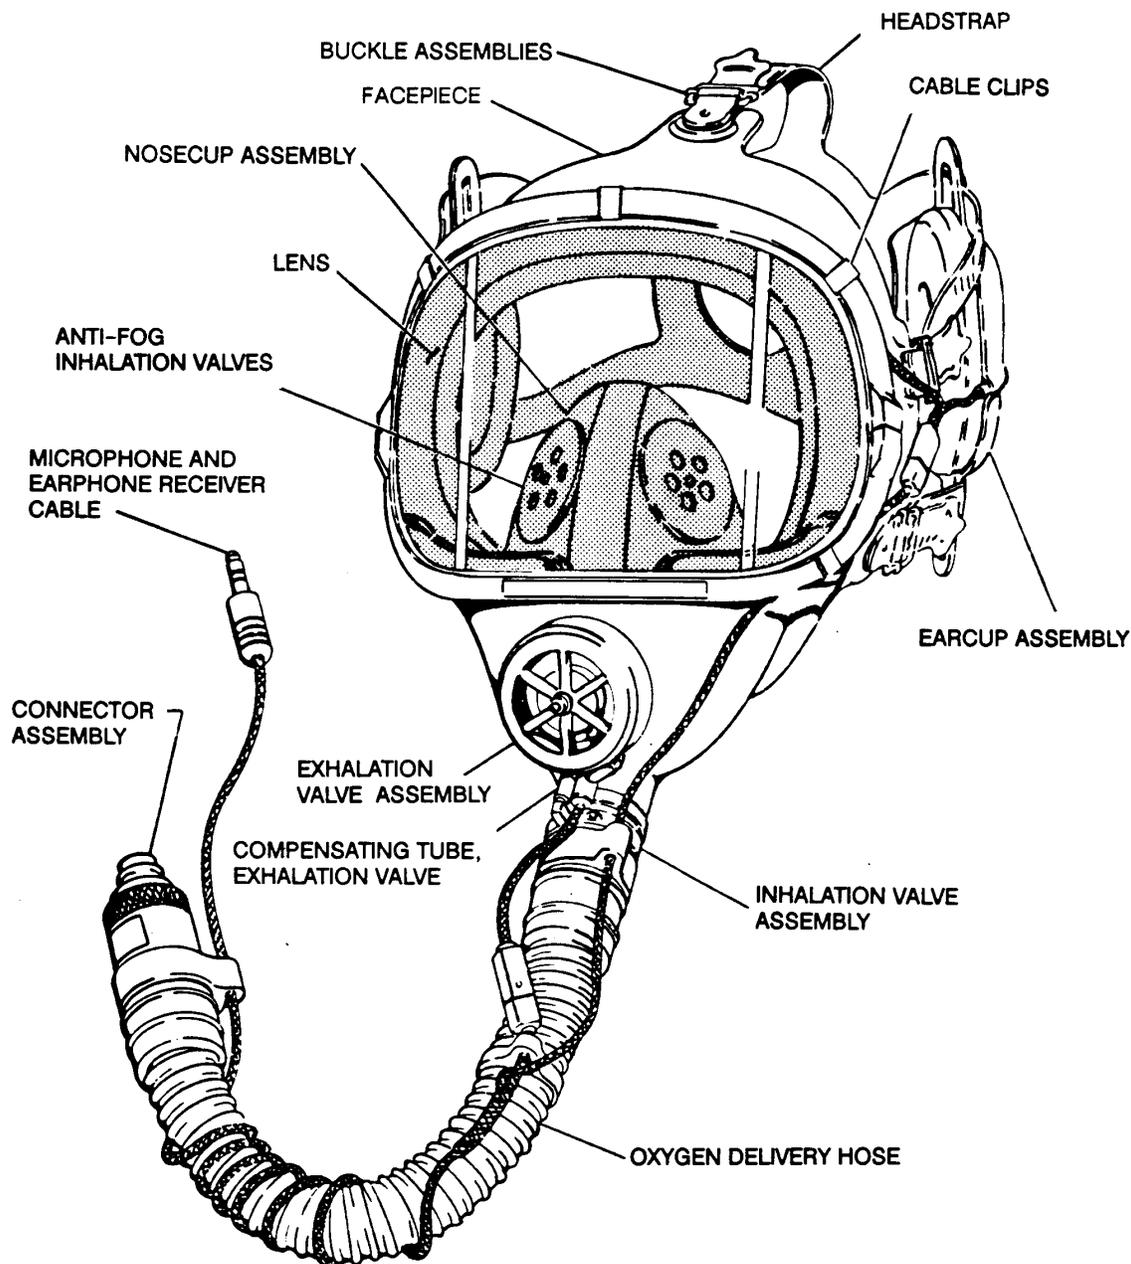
Typical fire fighter's smoke mask assembly components.
